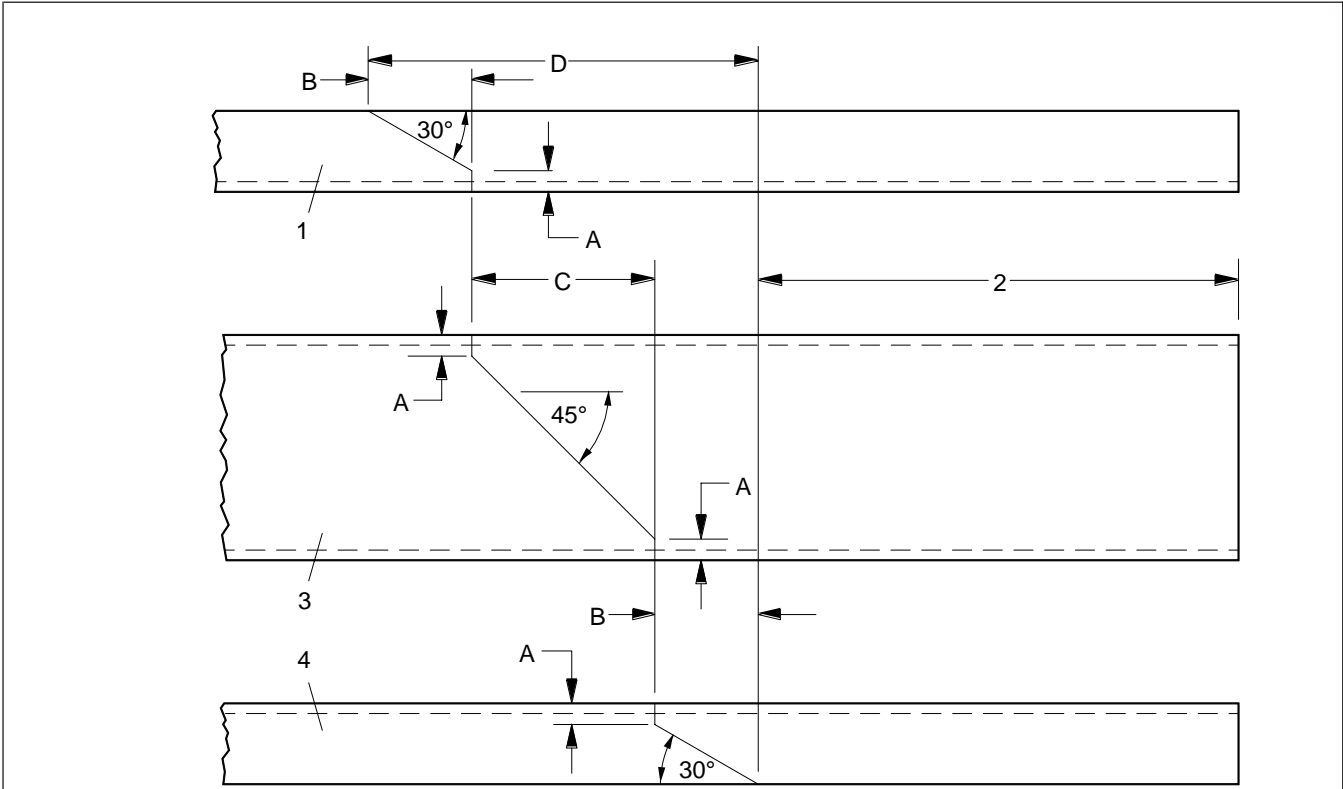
, Frame Rail and Extension Cutting Dimensions for Trucks
